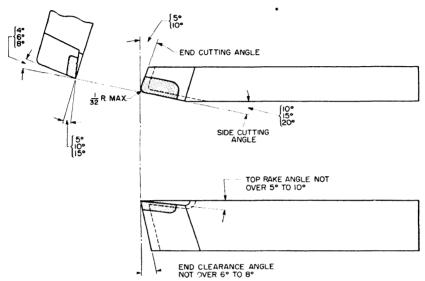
Tool angles for turning aluminum or zinc die castings with a carbide-tipped tool. See Table 9.6, showing tool angles for turning other alloys.
